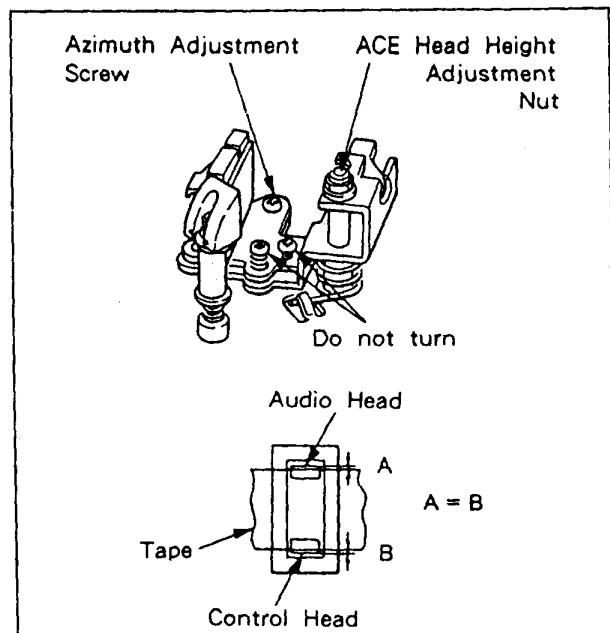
(3) Pre-set for Compl Head Bracket
